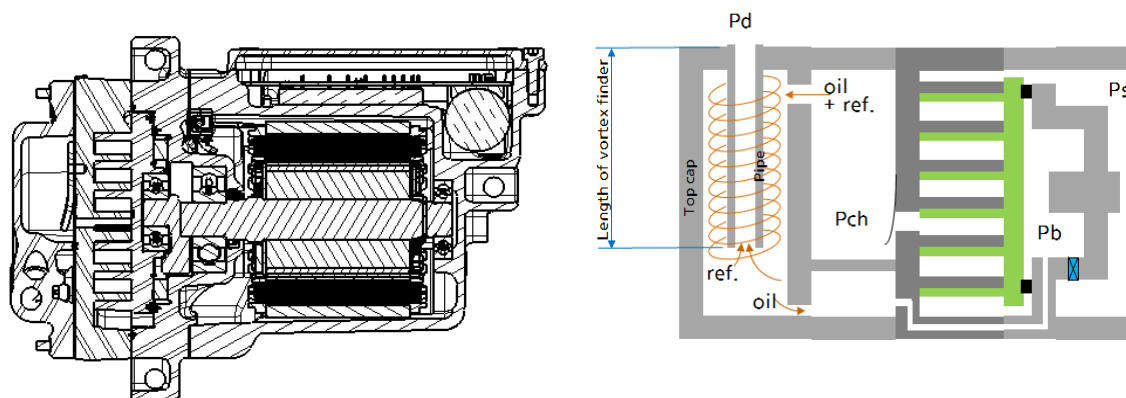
Section view of electrically driven scroll compressor and schematic diagram of oil separator
